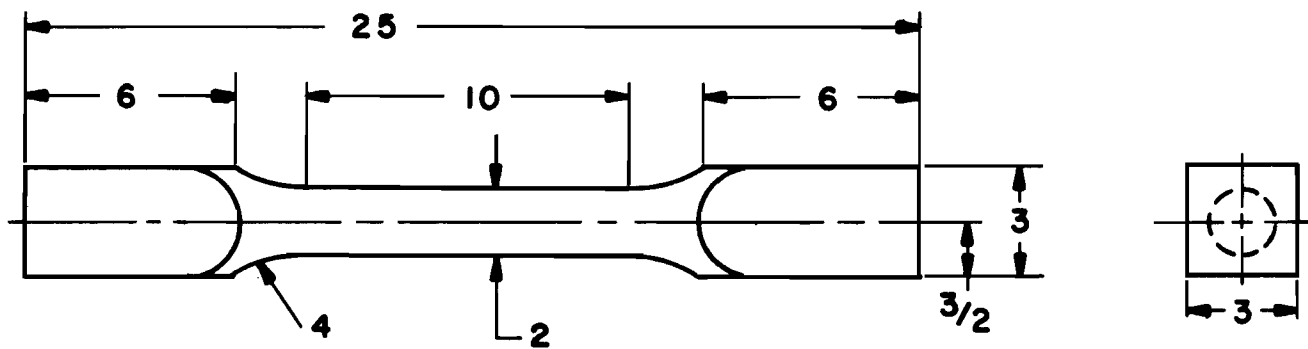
TYPICAL TORSION SPECIMEN SHOWING RELATIVE DIMENSIONS
